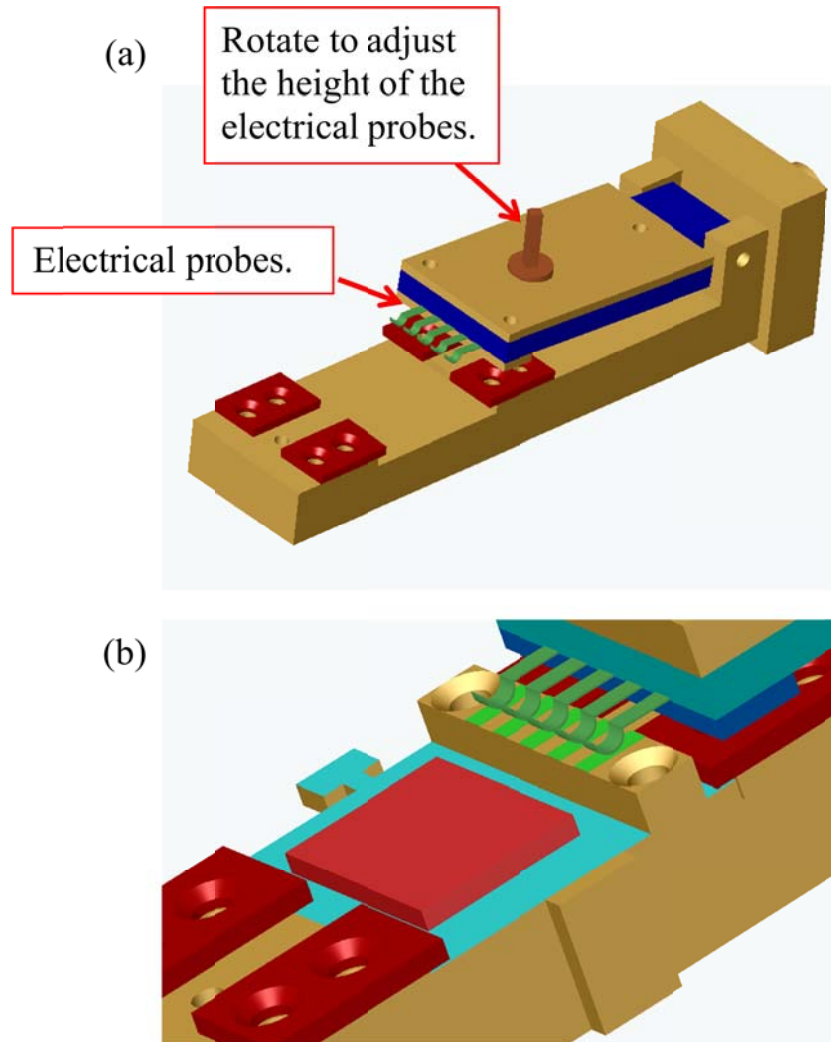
(a). SolidWorks drawing for Cu cold finger. The brown key is used to adjust the height of the electrical probes. The green probes are bent to provide some springing. (b). Picture of sample paddle in the measurement position.
